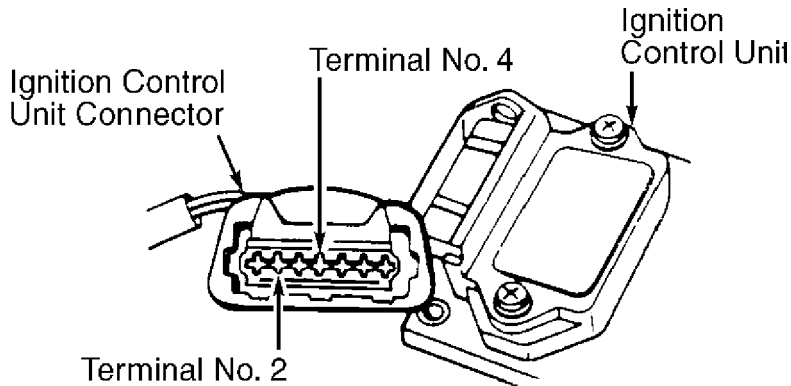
Checking Ignition Control Unit Voltage (Typical)
